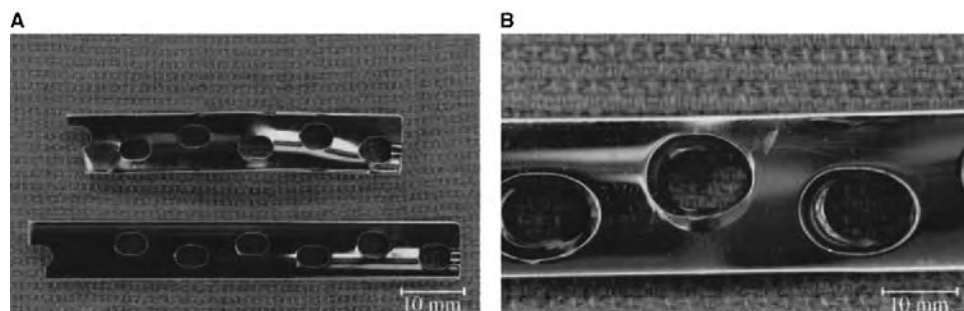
(A) Photograph of DC plate after retrieval and (B) photograph showing fretting in screw holes of DC plate.
